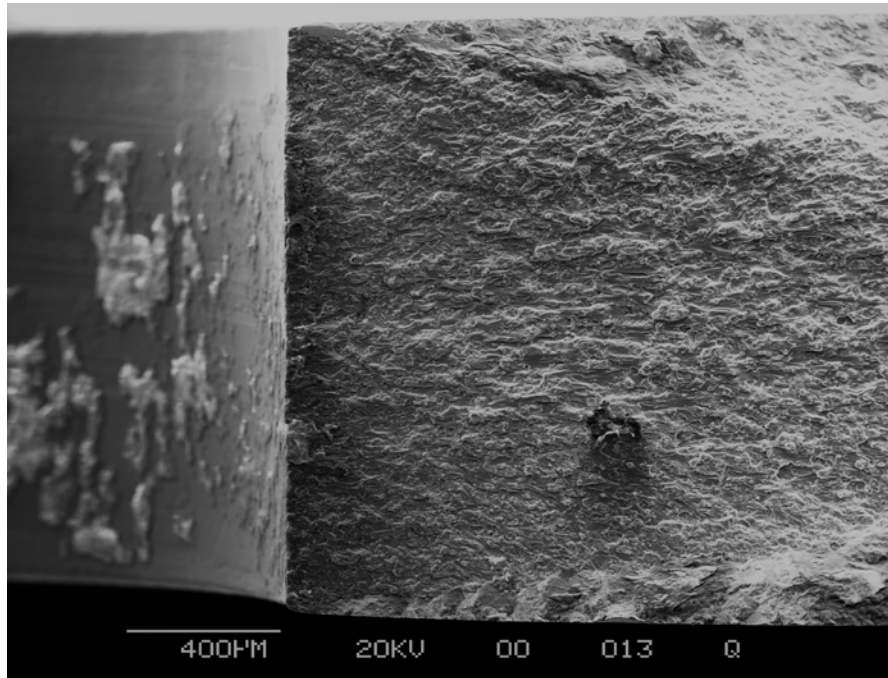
Fracture surface of specimen 6 showing crack initiation area
